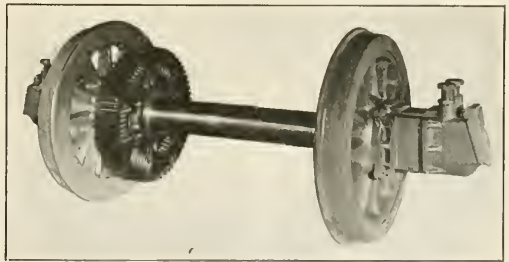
Driving Axle Ground Finish from End to End with Flexible Gear, Wheels and Boxes Mounted
